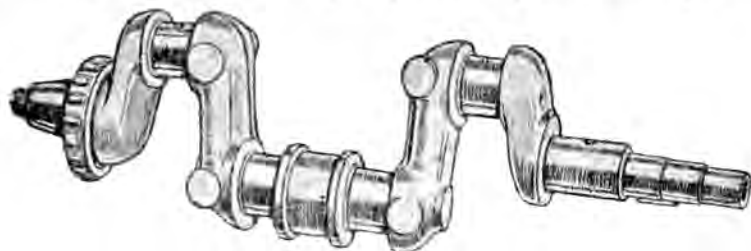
THE STURDY AND WELL BALANCED MINOR CRANKSHAFT
